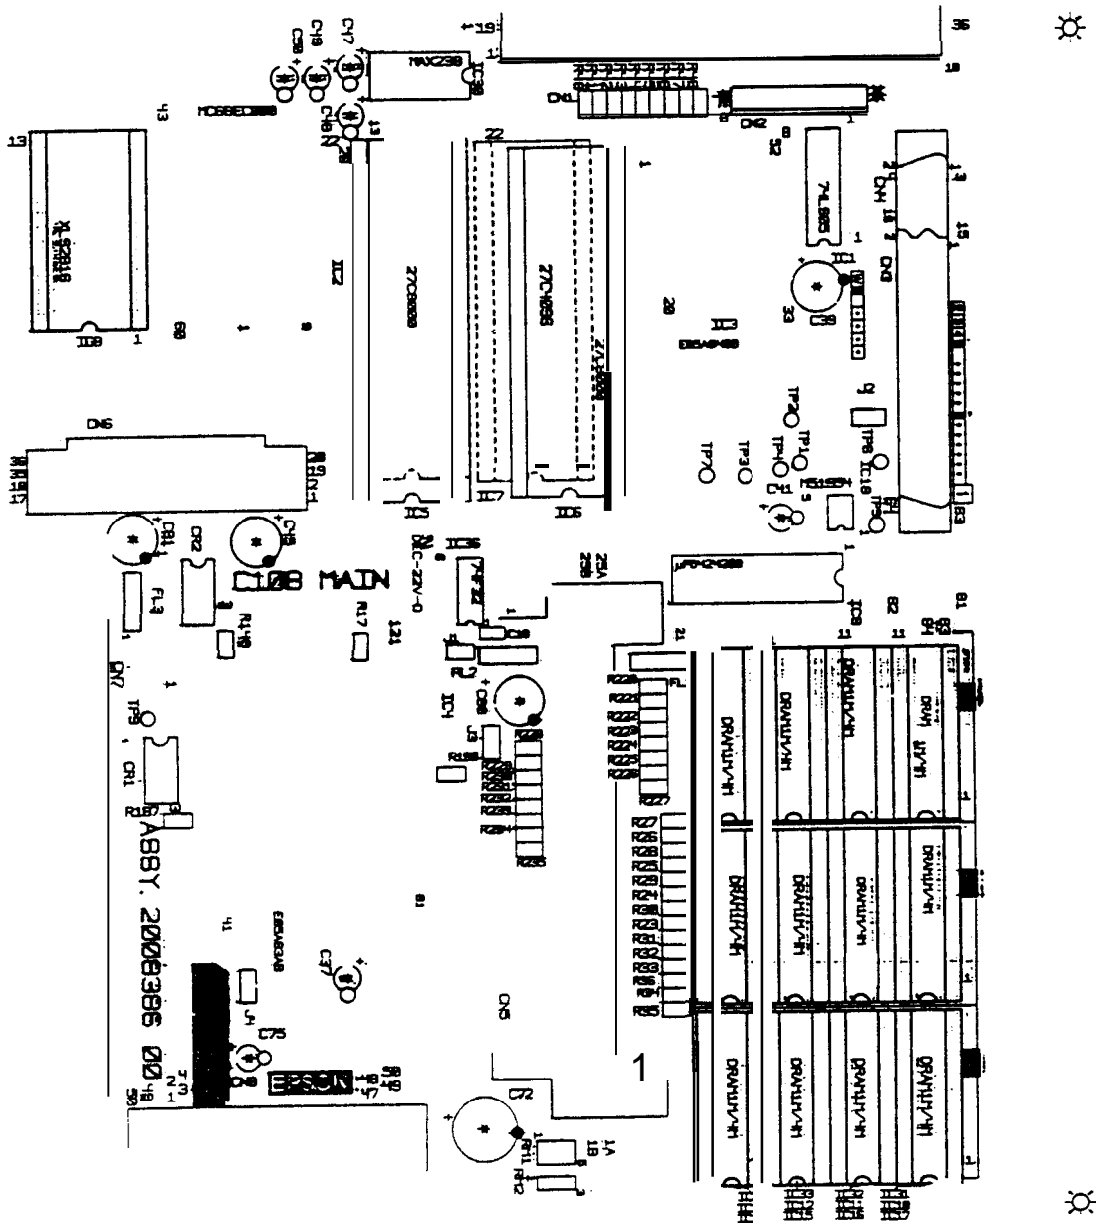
C108 MAIN Board Component Layout (Front Side)
